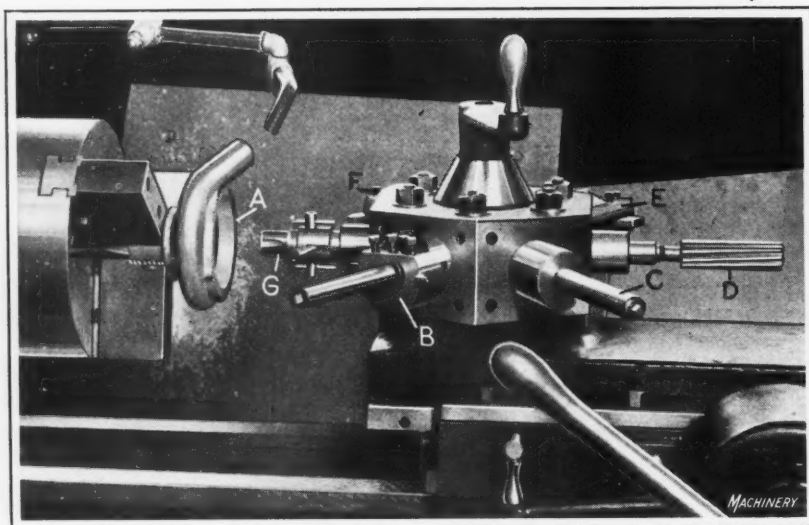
Tool Equipment of a Turret Lathe used for facing, boring, reaming, and tapping Water Pump Bodies
